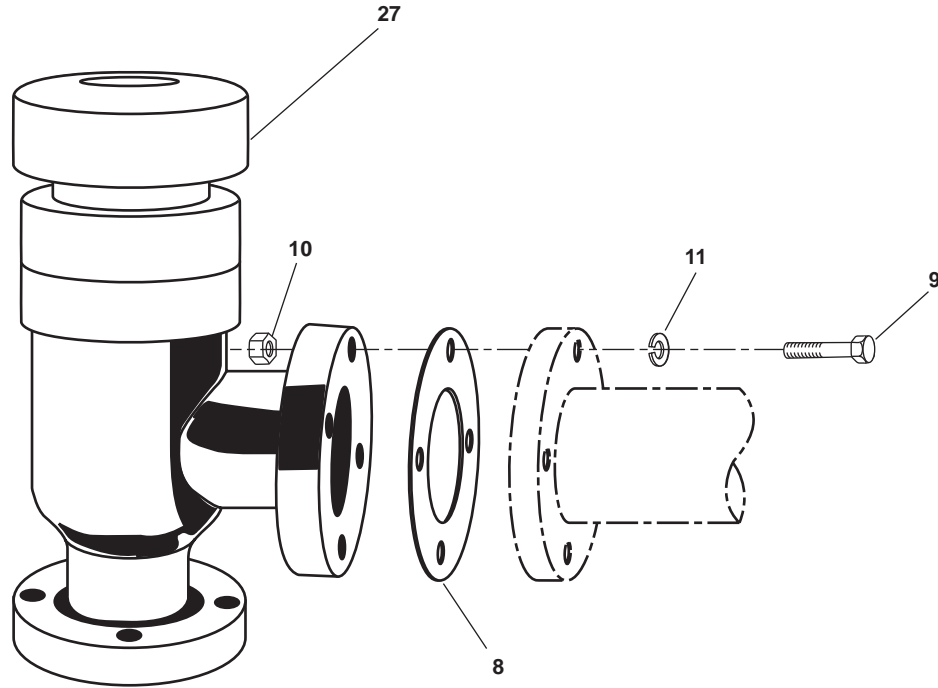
Fuel System Piping and Valves (Sheet 2 of 6)
